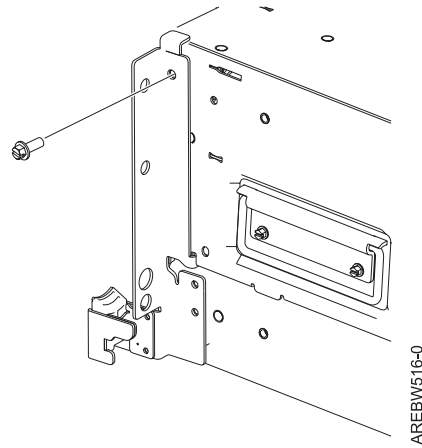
Rotate the top of the bracket back so that top tab is on top of the chassis and install the screws
